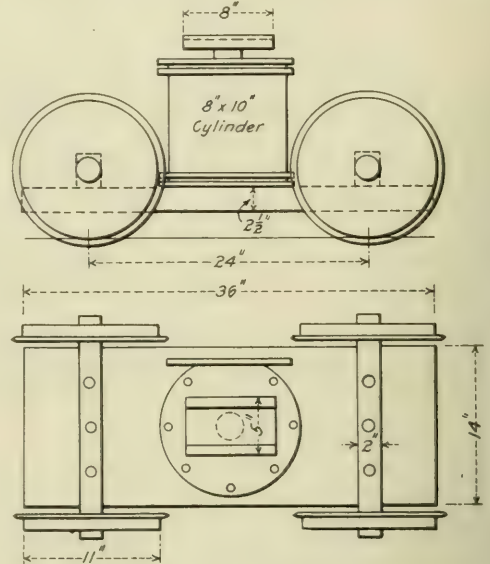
Lifting Jack for Use at Car Wheel Lathe.
